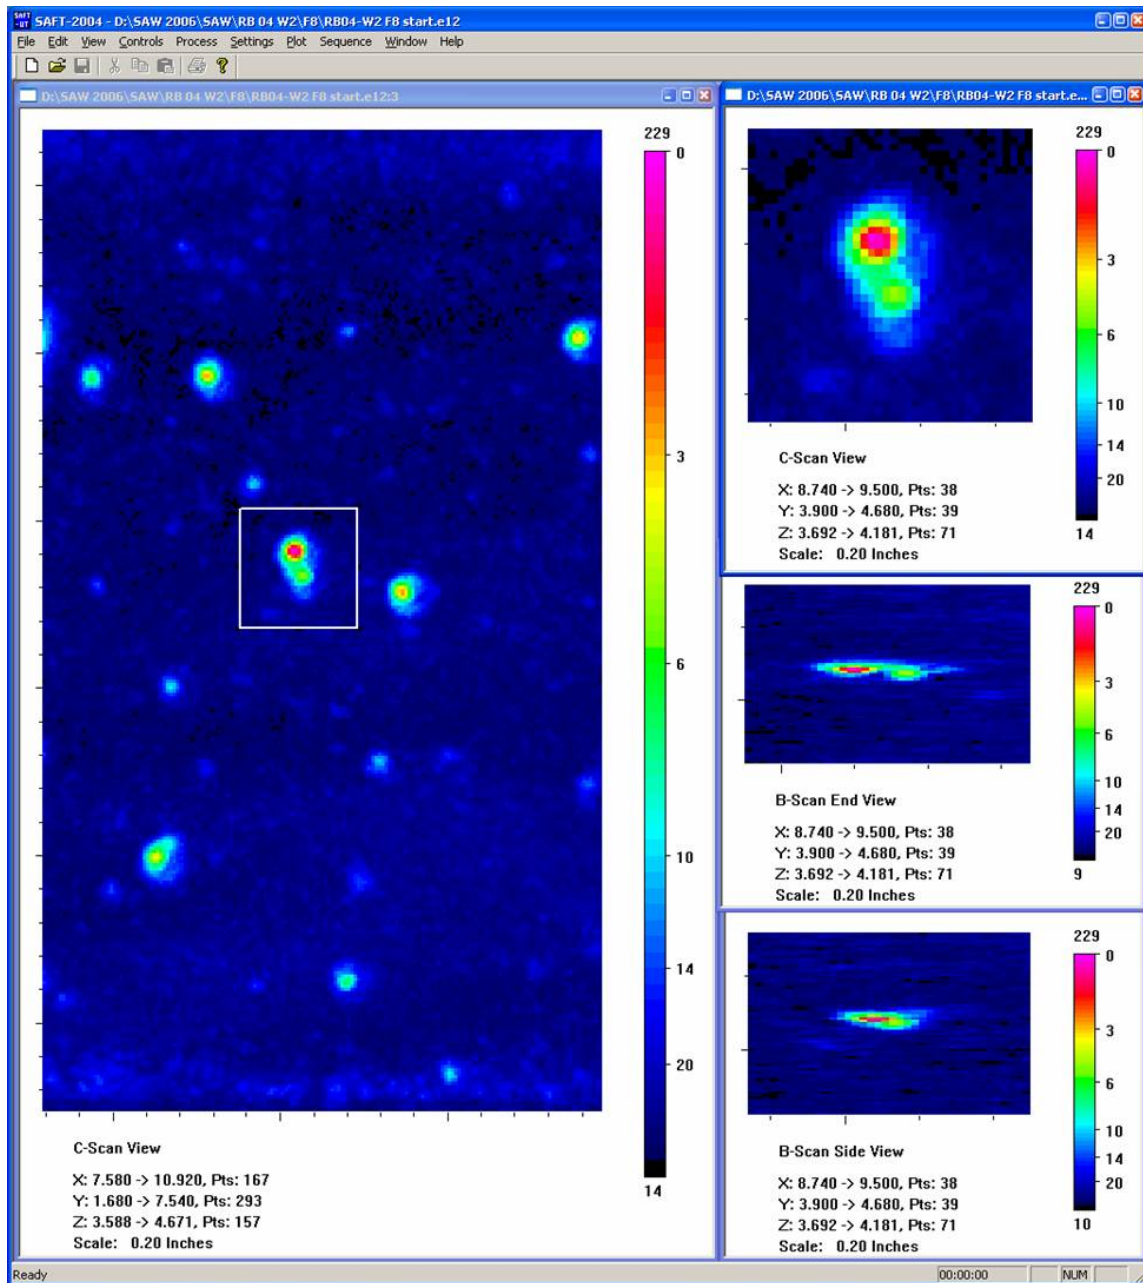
a 10 MHz F8 Immersion Testing Images of Small Fabrication Flaw: *RB2A*. This figure shows immersion testing data of a 5.5-mm flaw indication from the weld-normal testing of large weld segments. The flaw indication is identified in the box drawn in the SAFT-UT image on the left in the figure. A close up of the flaw in the C-scan view (top right) shows 2 unresolved flaws.
